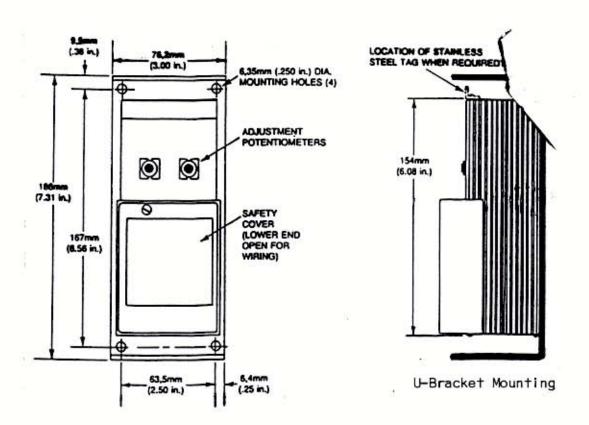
STD-Standard Housing with U-Bracket Mounting
